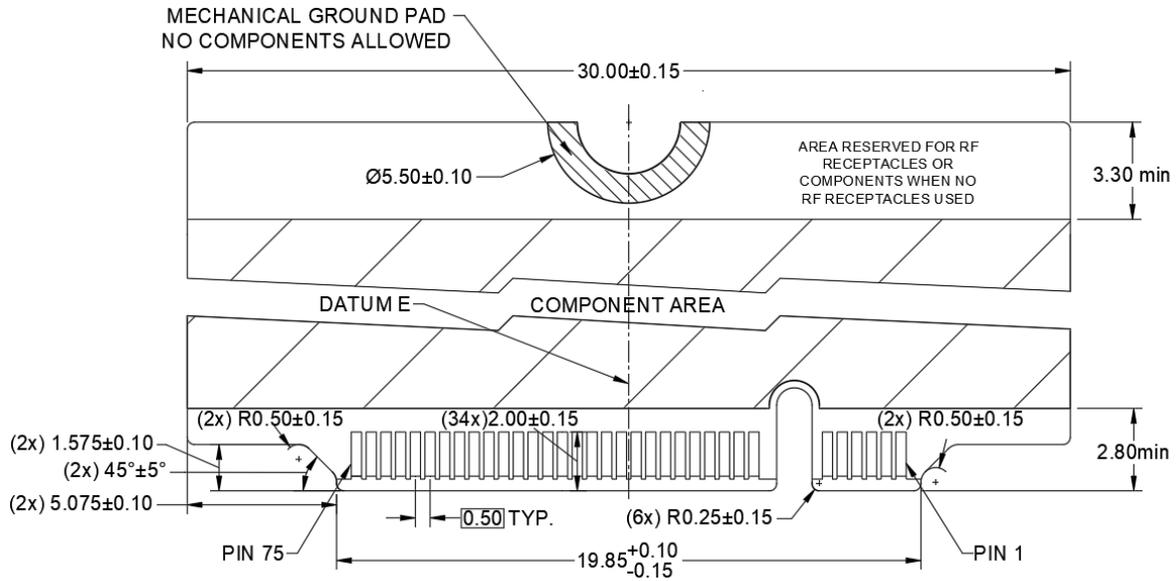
M.2 30XXX-XX-X-1A(C) Card Edge Outline Topside
